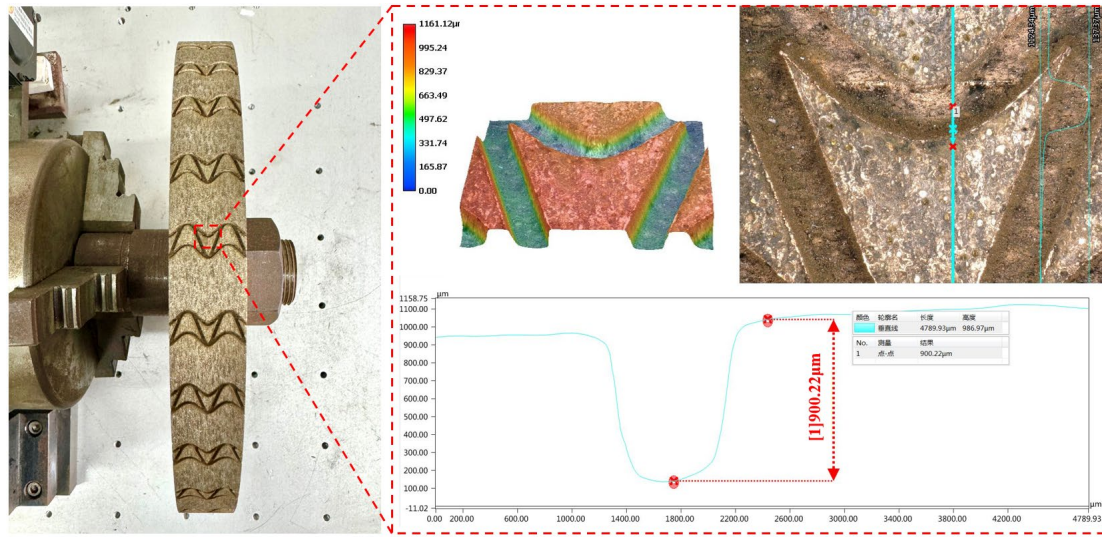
Surface topography of the diamond grinding wheel after the laser imitation shark fin structured.
